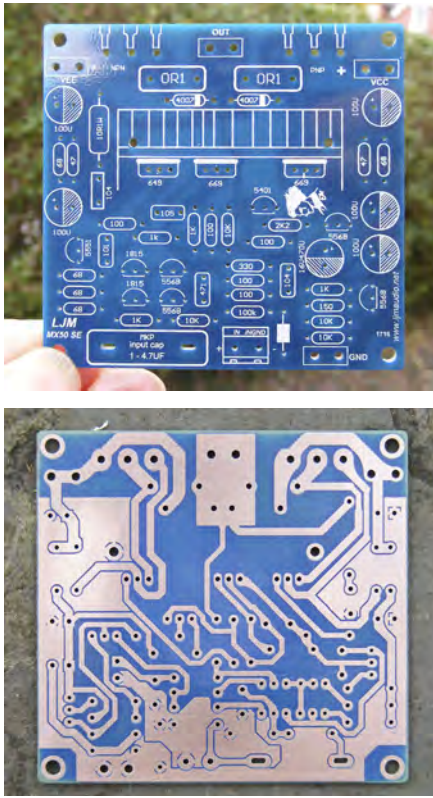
a) (top) The MX50 PCB, as supplied with component values, and b) (bottom) PCB track layout revealed after sanding.
